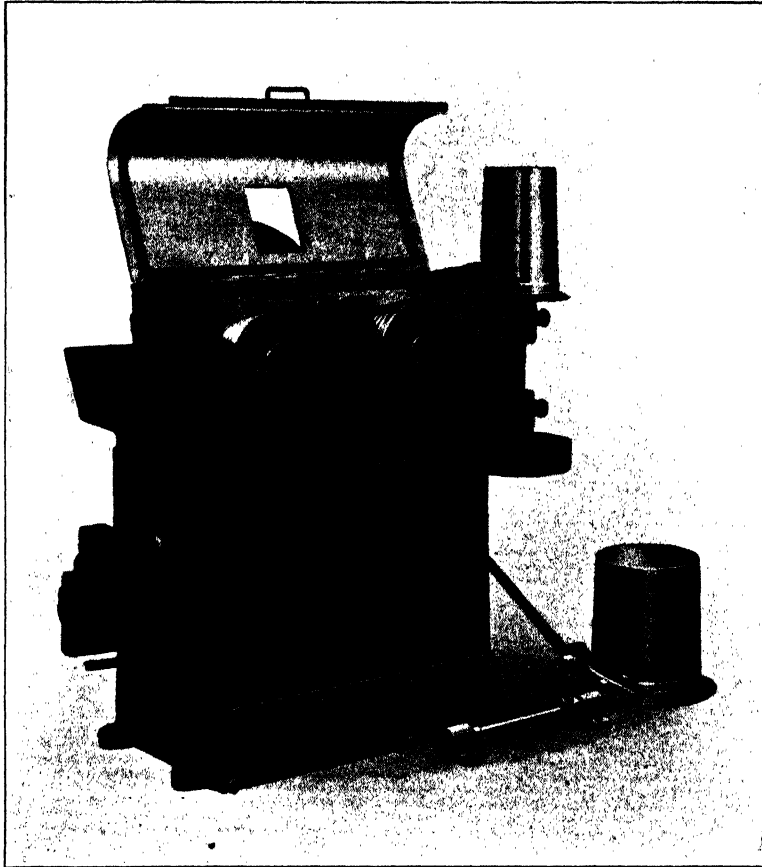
CONTINUOUS MACHINE FOR FINE WIRES—ROBERTSON.
